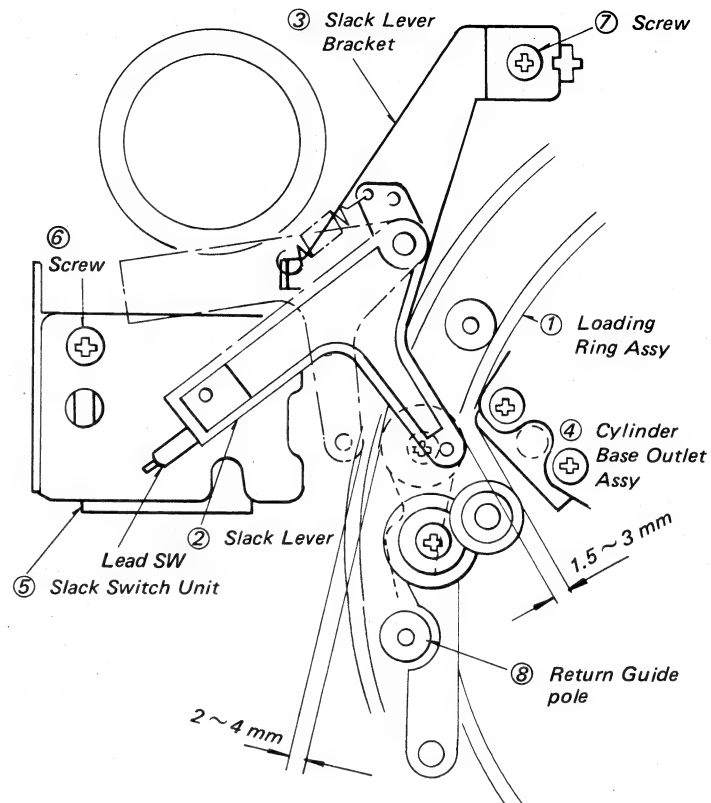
Slack Sensor and Slack Switch Checking and Adjustment.
